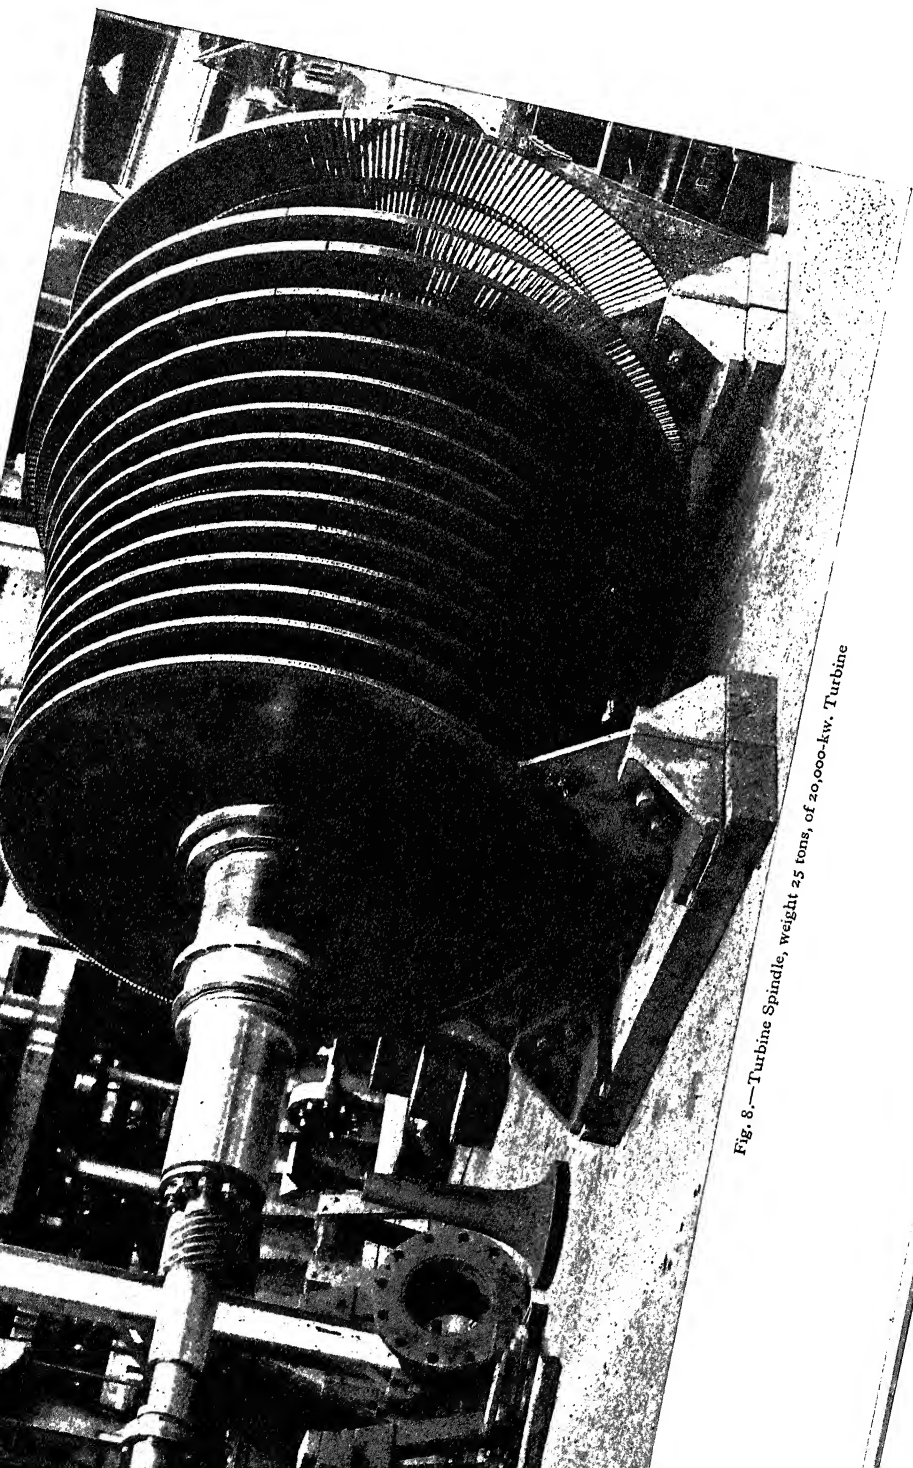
Turbine Spindle, weight 25 tons, of 20,000-kw. Turbine
